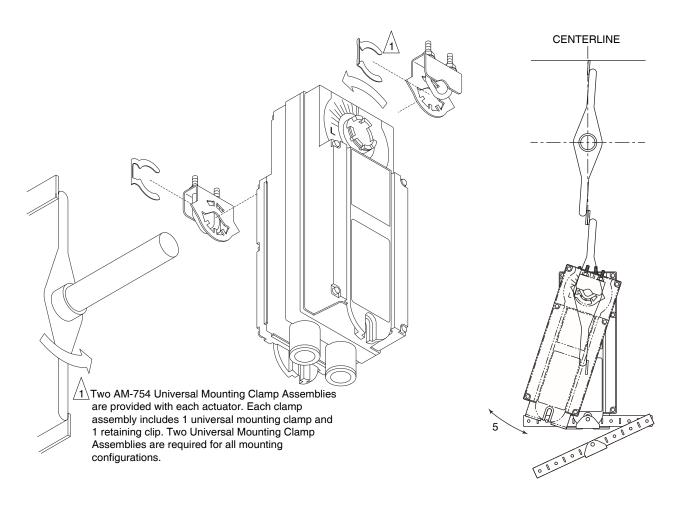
Long Damper Shaft Mounting with Counterclockwise Spring Return for Normally Closed Damper.
